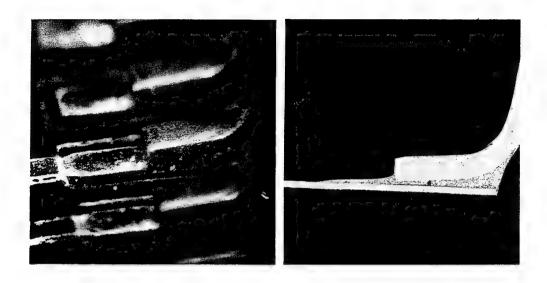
Typical non-tinned, probably oxidized, non-solderable gullwing toe-end solder fillet, and cross-section of the solder joint
